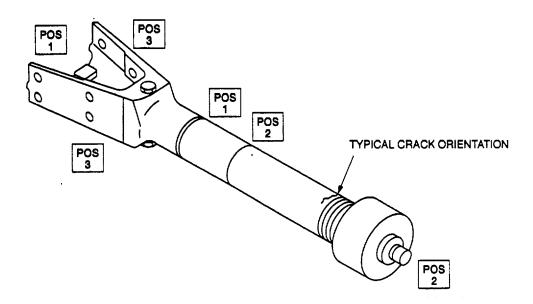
Stabilizer Bar Tube Assembly 2-48
